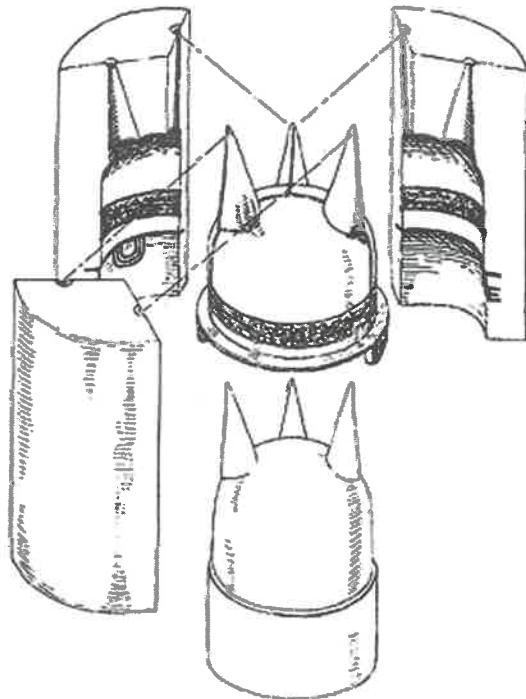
Mold for Bronze Casting. Shang bronze vessels were made with ceramic molds. After the molten bronze hardened, the pieces of the mold could be removed. (© Cengage Learning)
